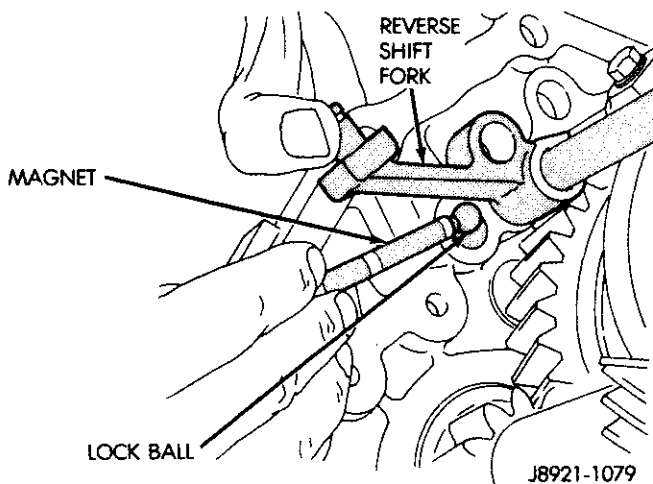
Removing Fifth Gear Shift Rail Lock Ball
